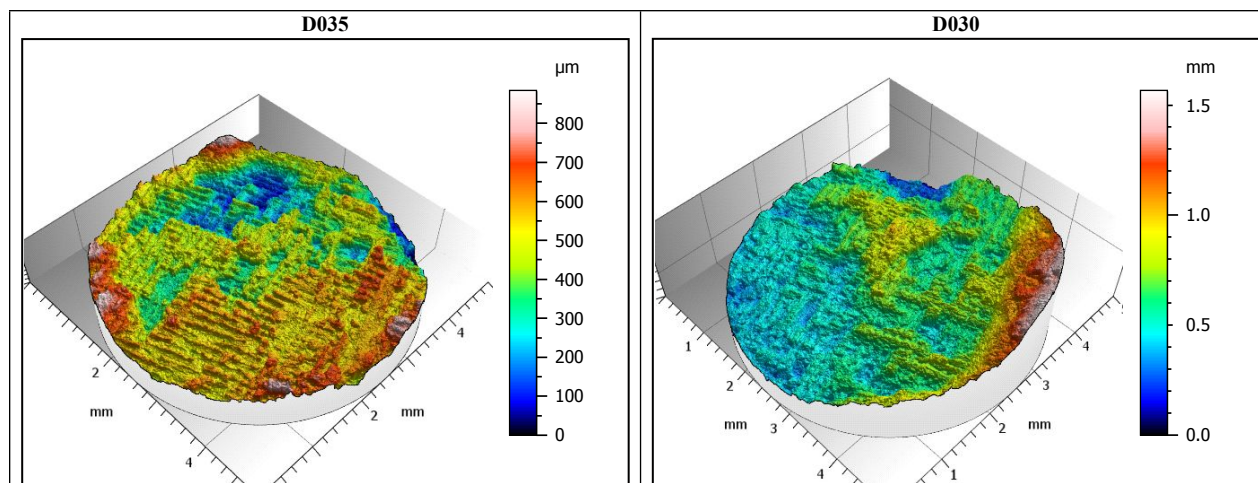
Extracted fracture surfaces of different tested specimens (ROI).
